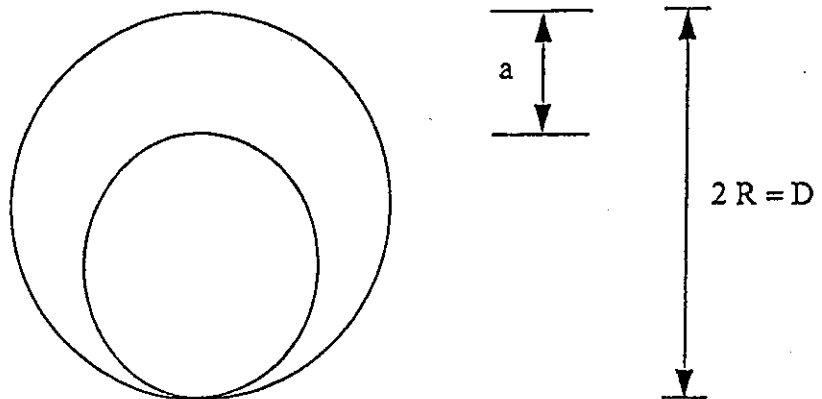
Sickle - Shaped Crack Front in Failed Bolt
